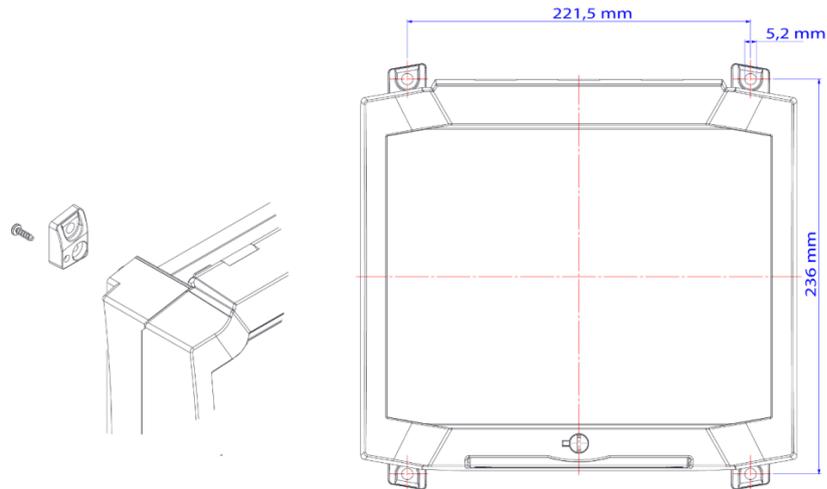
Wall mounting parts and dimensions of the drill holes of the FILTER|CONTROL.
